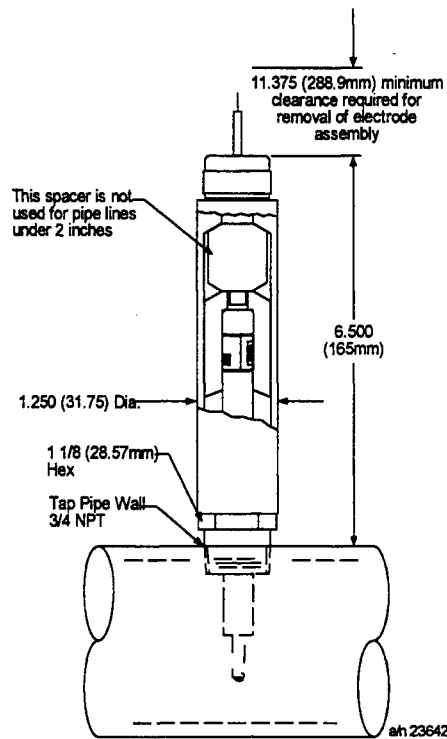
7758 Durafet Electrode Mounting Dimensions, Shown Threaded into a Larger Pipe (Top spacer is not used for pipe lines under 2 inches)
